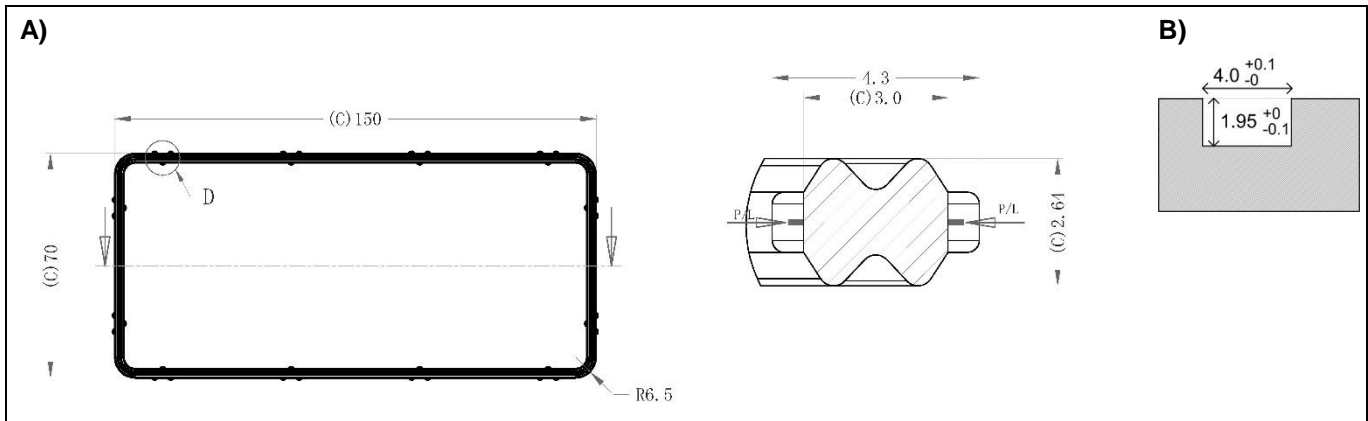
Drawing of sample sealing ring designed by Transtech with knobs supporting the assembly process (A). Corresponding groove size in the cooler (B).
